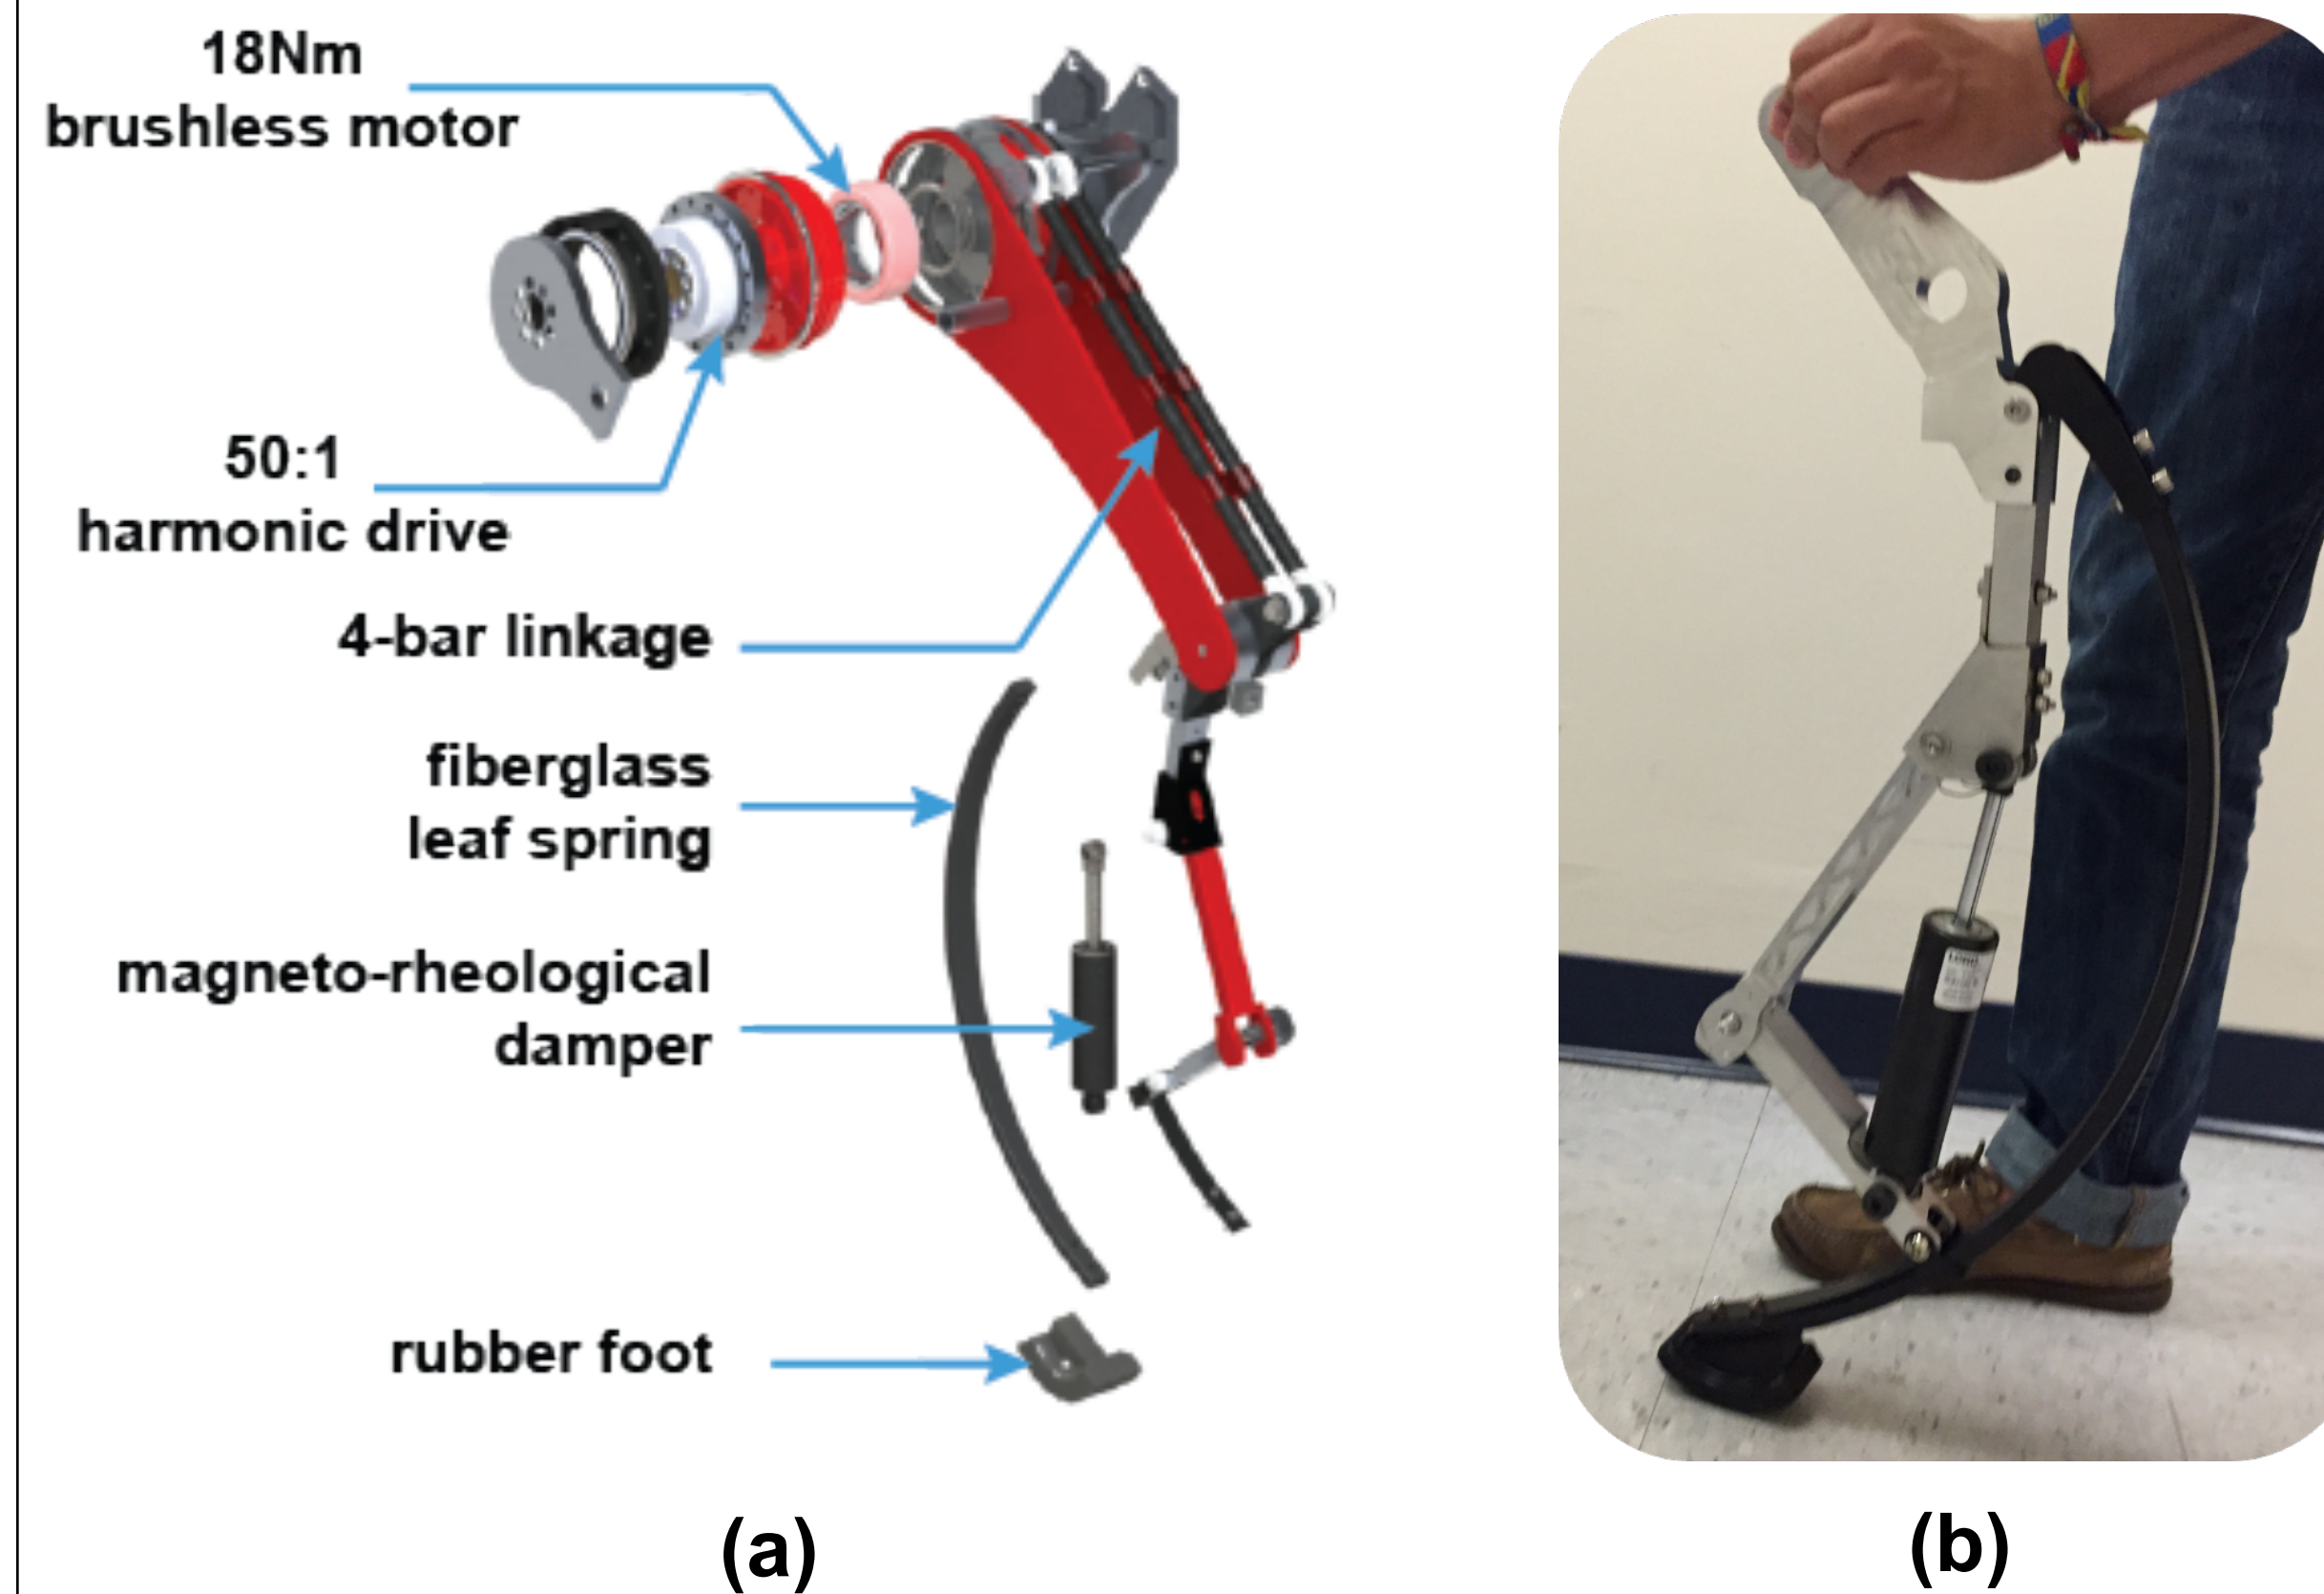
(a) Exploded view of leg design CAD, (b) picture of built lower limb
